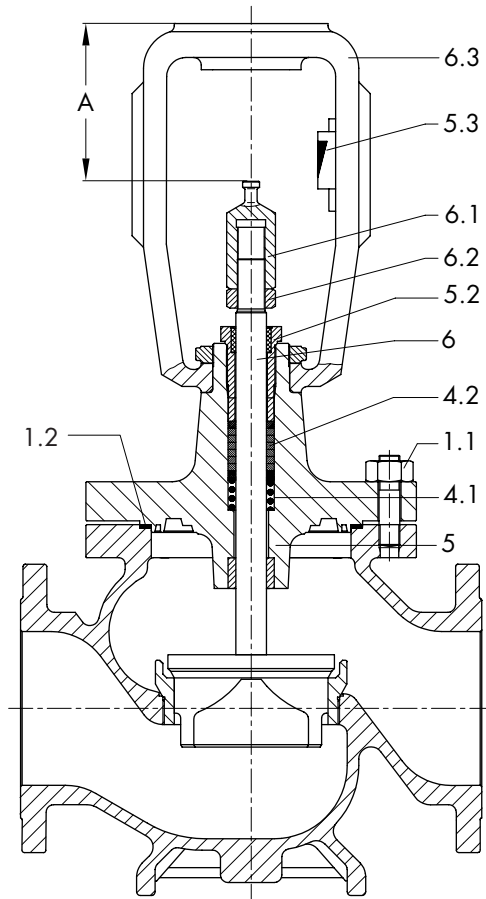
· Sectional drawing of Type 241 in nominal sizes DN 200 and 250
